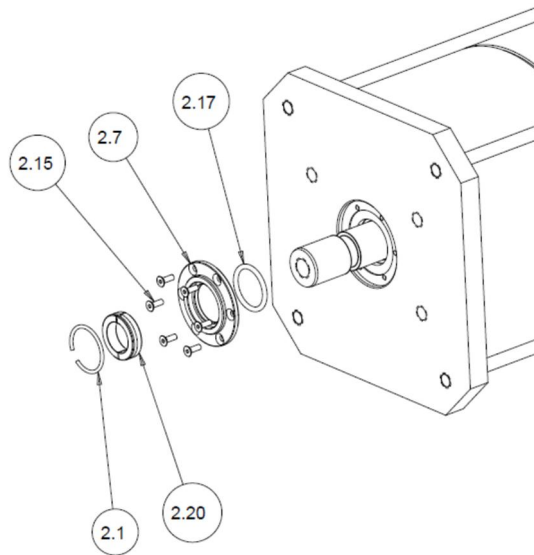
Pneumatic cylinder seals replacement of single acting actuator
